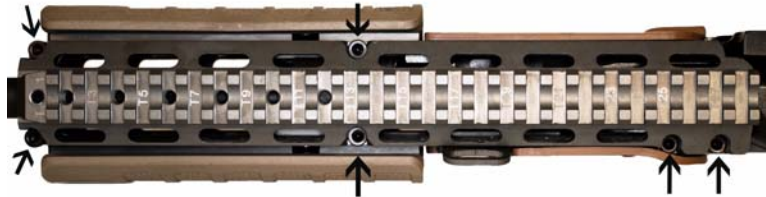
Barrel and Receiver Assembly Fieldstrip.
